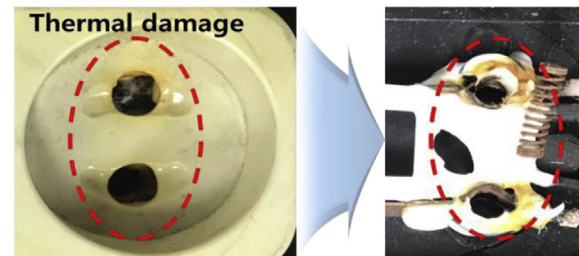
Electrical socket outlets' contact hole carbonization on the inside and outside.
